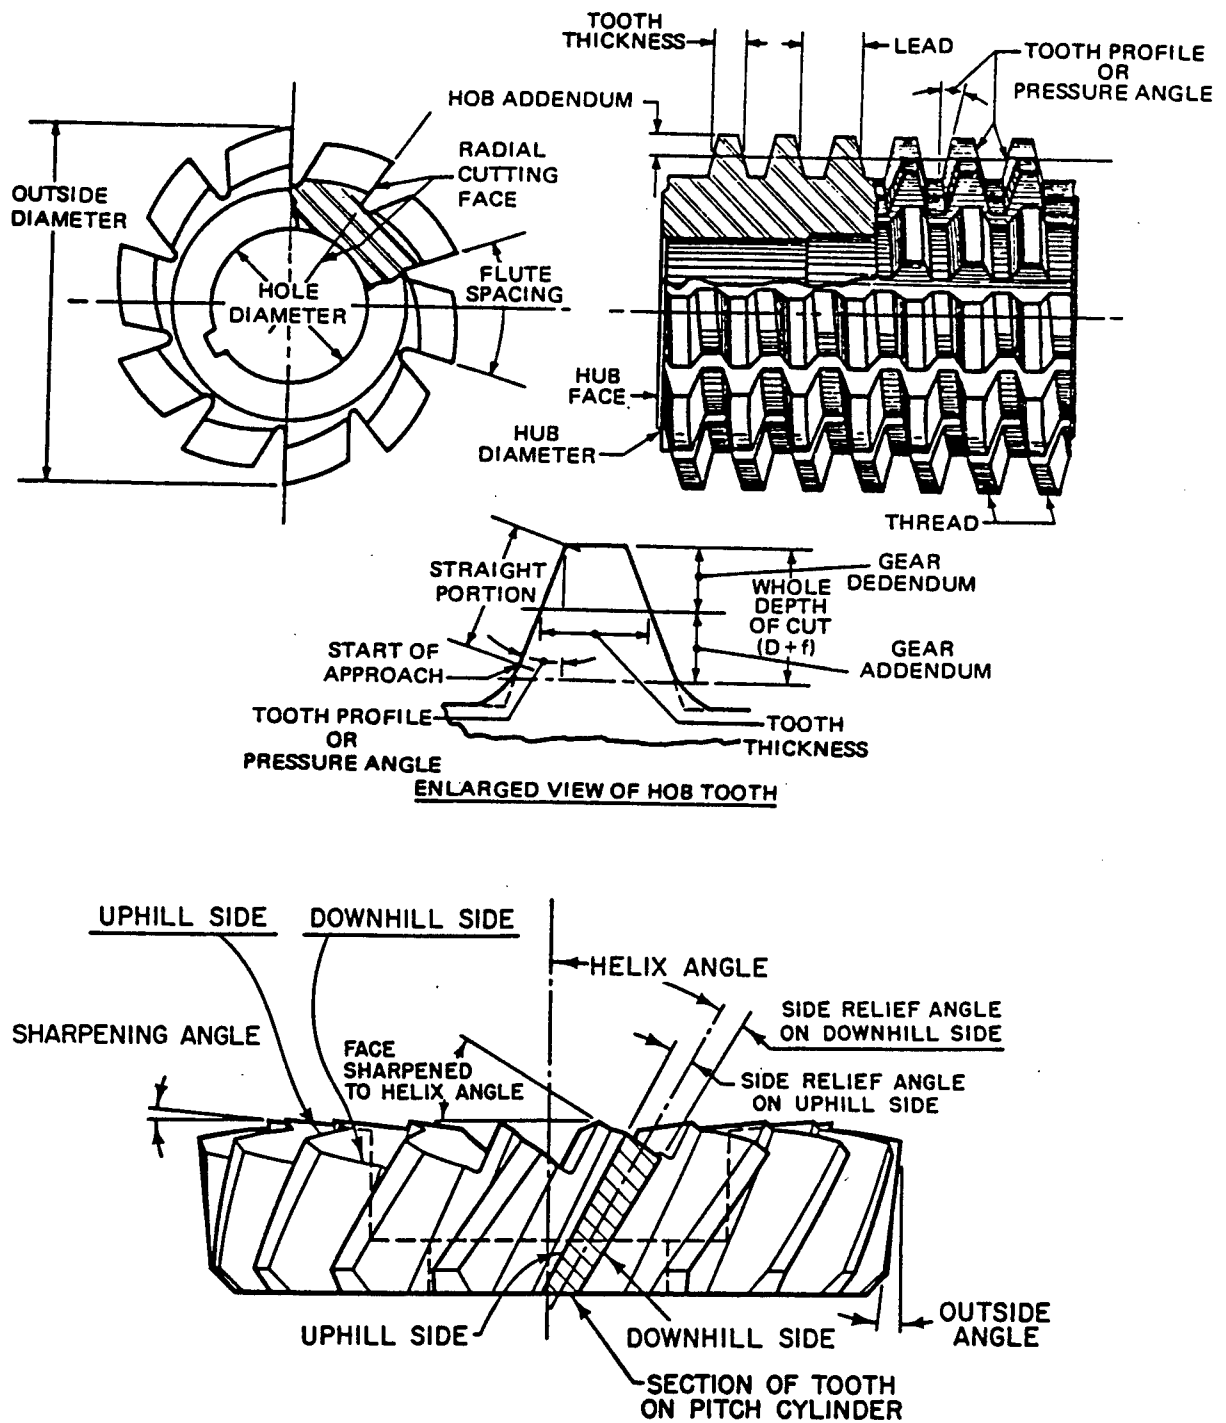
Basic Geometry of a Hob and a Shaper Cutter (11,16)
